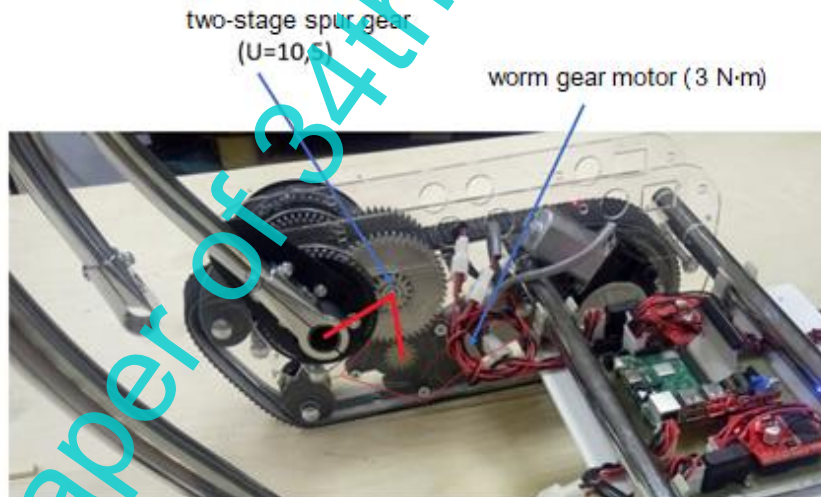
Design of the drive for the lower link of the AMUR-307 robot
